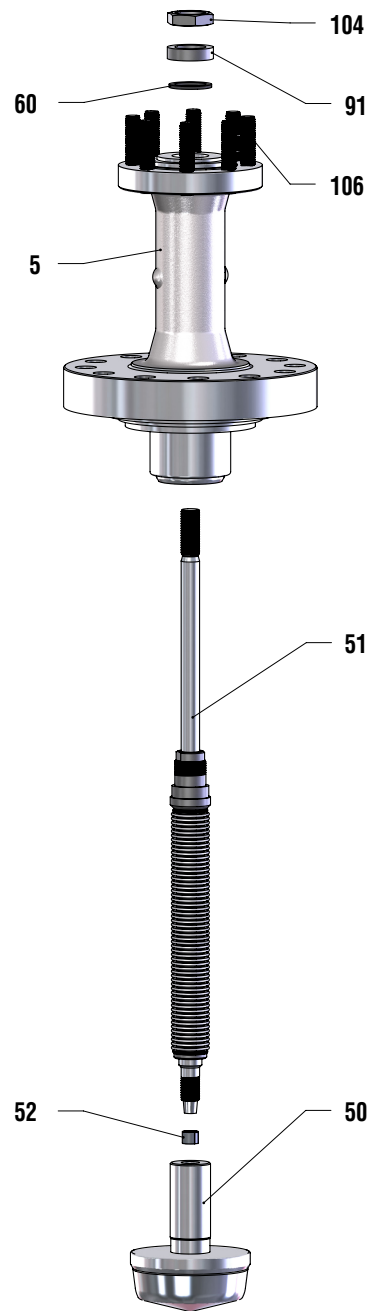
Disassemble / Reassemble the valve with bellows seal assembly for type B design
